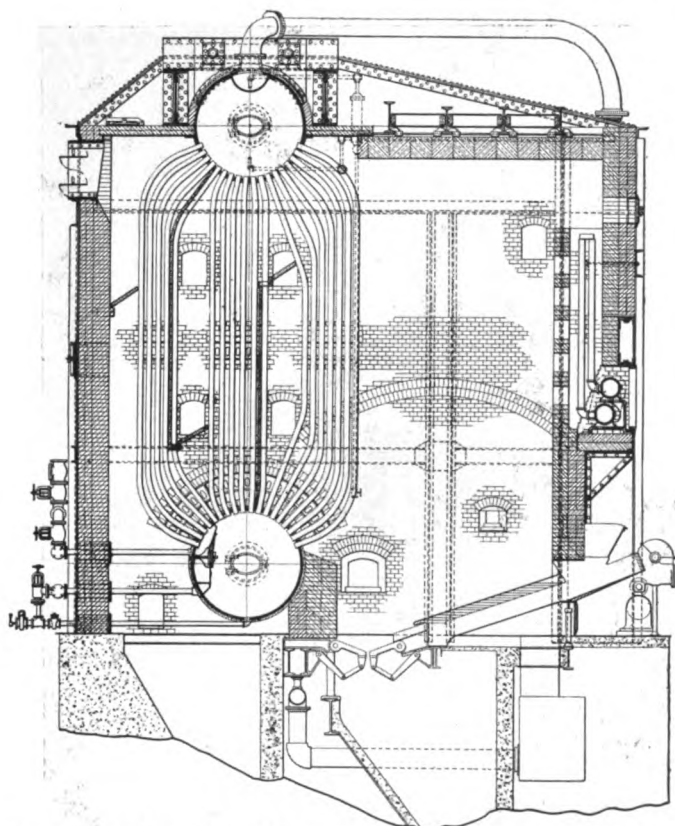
Interior view of Spang Chalfant Company underfeed stoker installation, applied to Ladd boilers.
